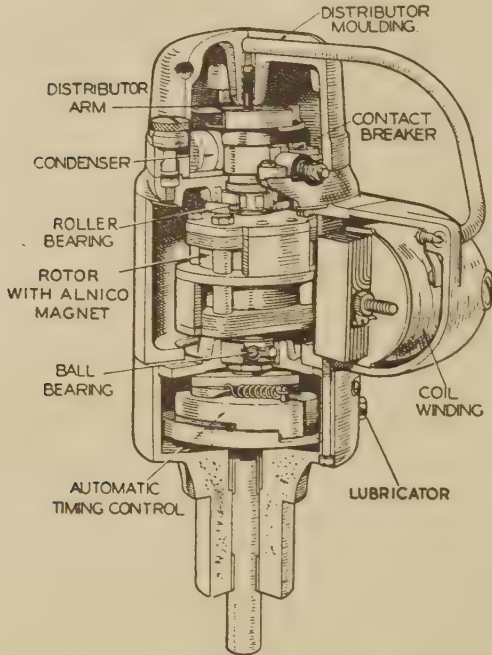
The Lucas Vertical Type Camshaft Magneto (Model 4VRA) with Automatic Timing Control.
